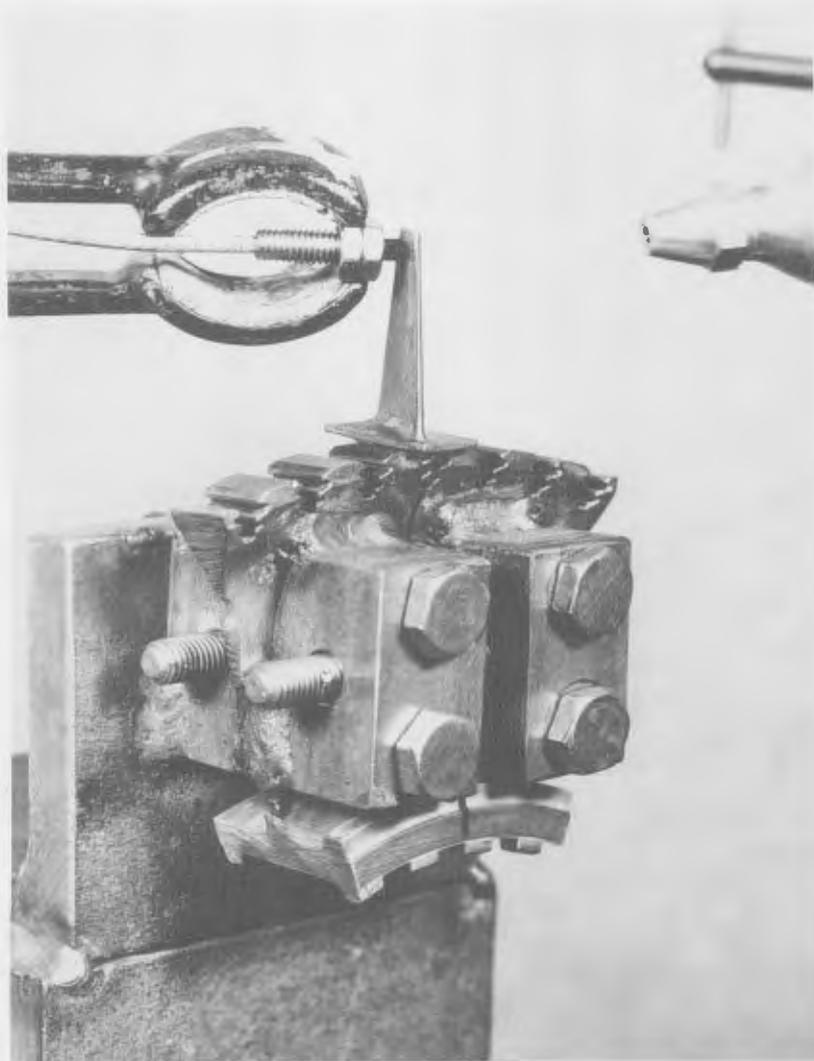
SINGLE BLADE – FREQUENCY TEST FIXTURE
